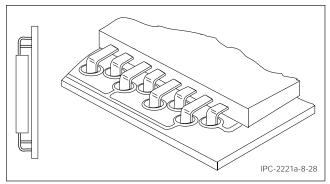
Examples of Configuration of Ribbon Leads for Through-Hole Mounted Flat-Packs
